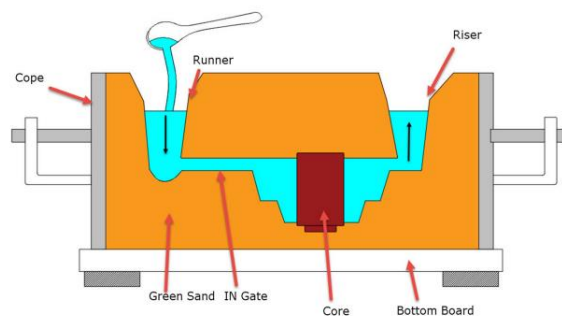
Illustration of sand-casting mold design (Kumar et al, 2024)
